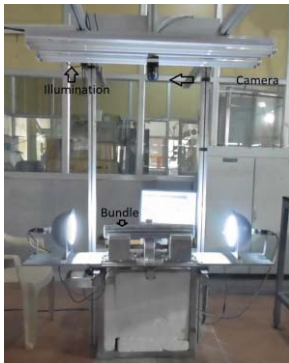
PHWR fuel bundle surface inspection system.
